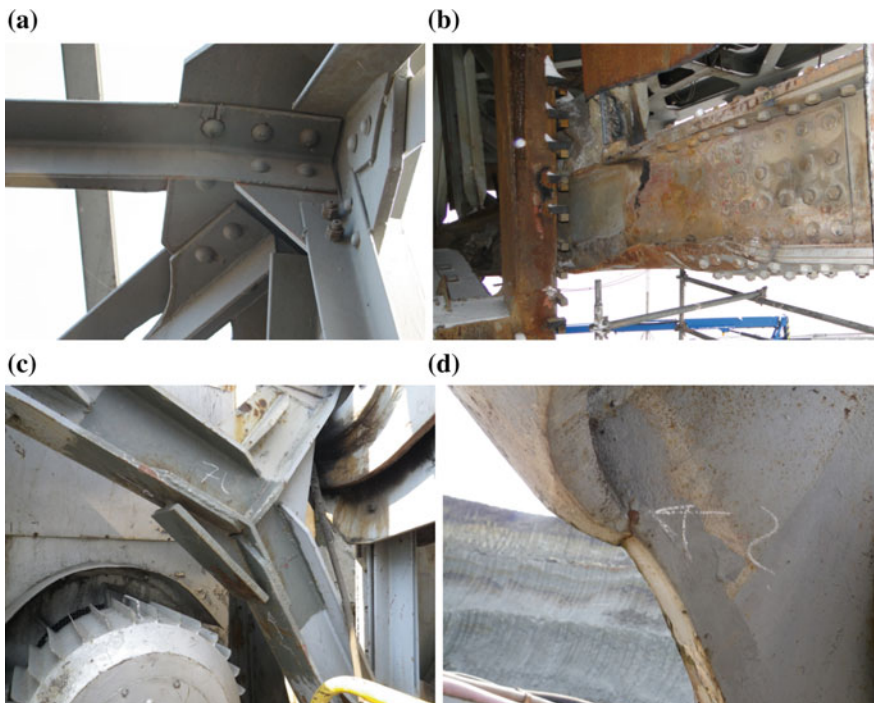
Examples of damage to the bucket-wheel boom: a deformation and fracture of structural joint; b ultimate failure of the horizontal beam of the boom, near the bucket wheel; c fracture of the joint near the attachment of the torque beam of the bucket-wheel drive, d fracture in the eye reinforcement of the boom attachment
